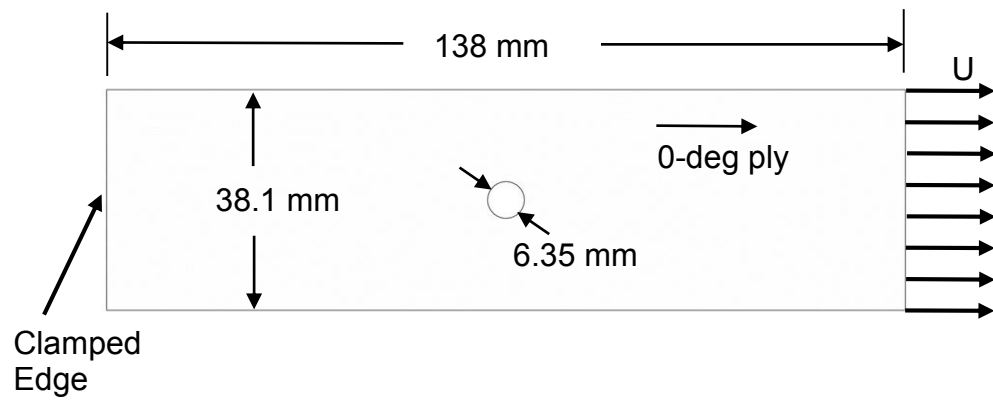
Dimensions of IM7/977-3 open hole specimen.
